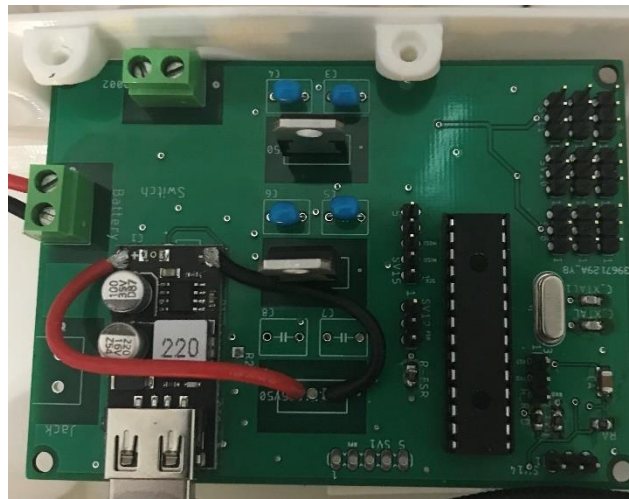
Final PCB with all subsystems integrated into the robot after testing.
